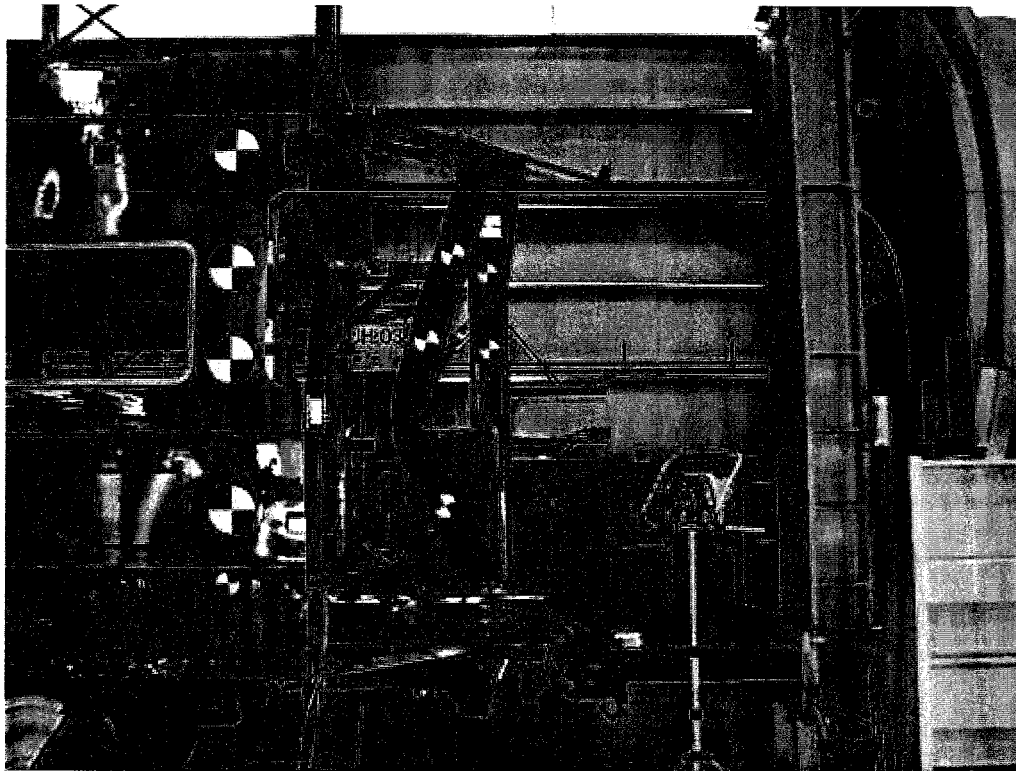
Final Position of End Frame Assembly with Loading Fixture Removed
